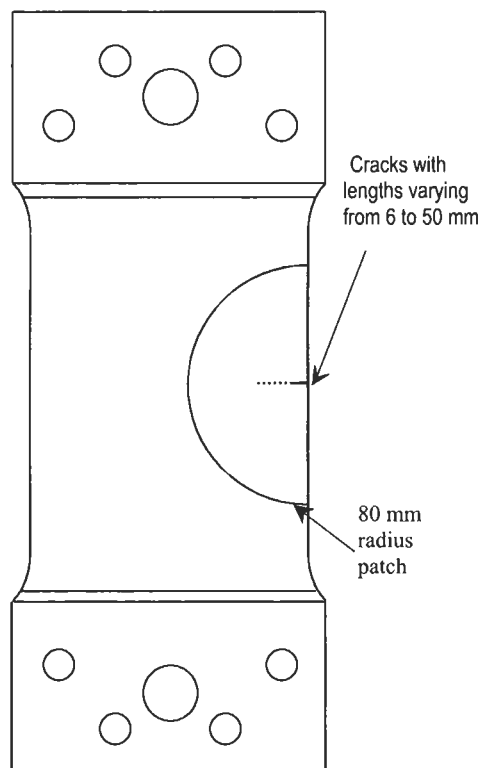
Geometry of edge cracked edge notch test specimen.
